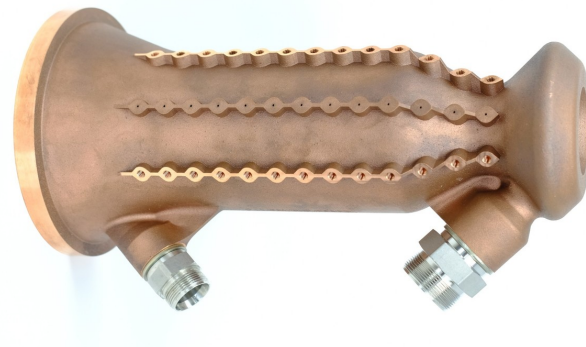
The first CuCrZr combustion chamber immediately after printing. Cracks were visible at several locations on the chamber where powder dosing had been insufficient.
